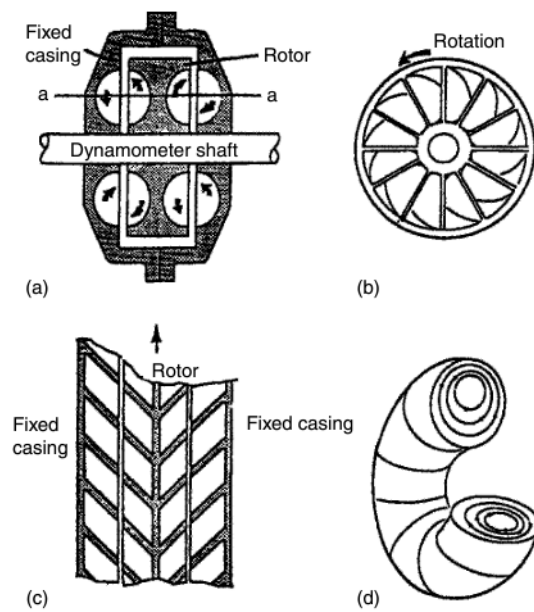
Diagrams of the operating principle of a hydraulic dynamometer: (a) dynamometer cross-section; (b) rotor end view; (c) unwrapped rotor & casing section; (d) toroidal vortex formation [11].
